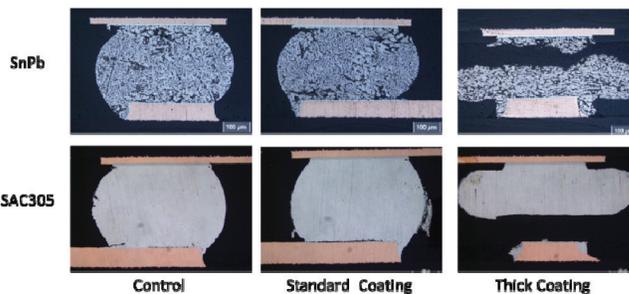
Cross sections of solder joints with acrylic conformal coating.
